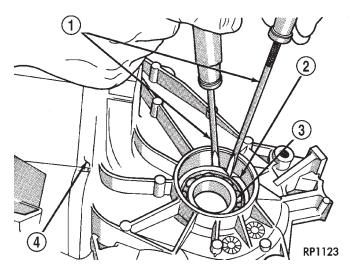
Front Output Shaft Bearing Retaining Ring Removal
